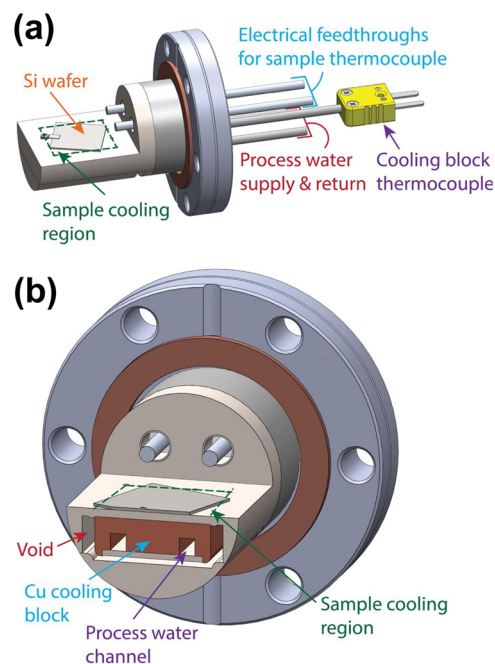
(a) Cooled sample stage showing the horizontal sample stage inside the chamber and electrical feedthroughs and coolant lines outside the chamber. (b) Cross sectional view of horizontal sample stage with sample cooling region defined by Cu cooling block.
